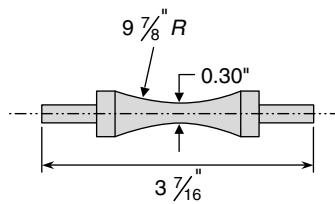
Test specimen for R. R. Moore rotating-beam machine.
